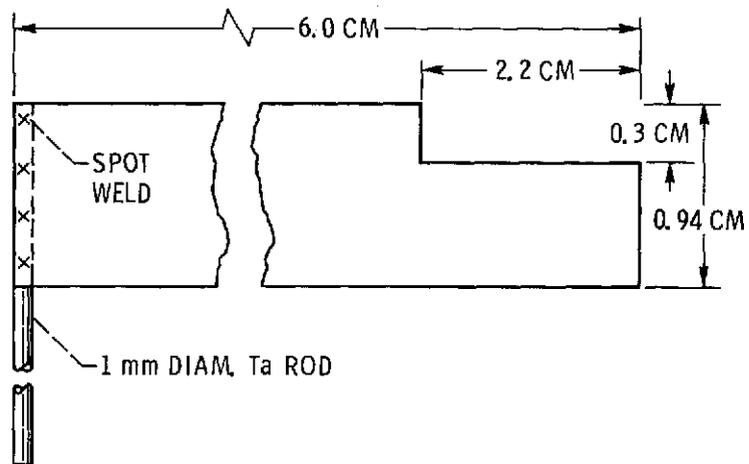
Unrolled view of 0.0127 mm Ta foil insert.
